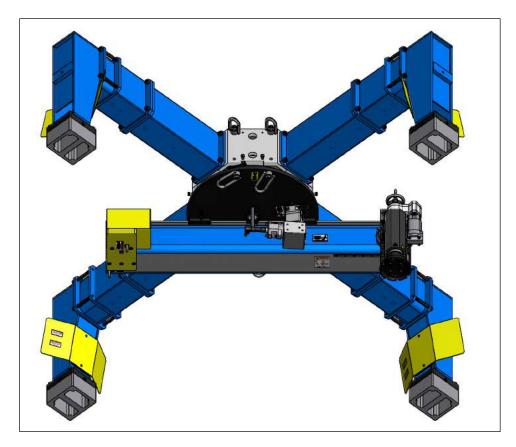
OD MOUNT WITH SWIVEL HEAD COUNTERWEIGHT ADAPTER PLATE
